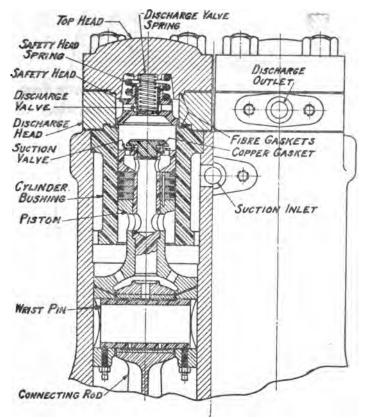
Cylinders of York Manufacturing Co. vertical, single-acting, twin-cylinder, CO₂ compressor.
